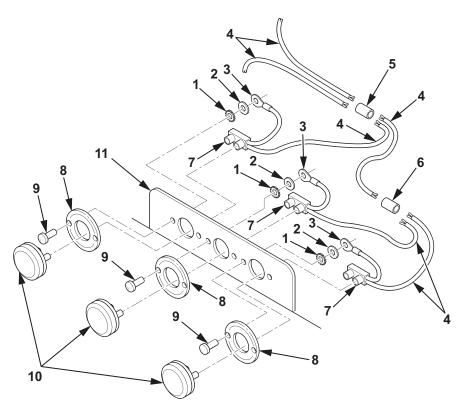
Lower Rear Marker Lamp Assembly Removal and Installation.
